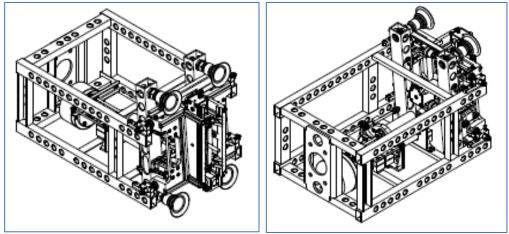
Drawings of the measuring system - replicator for groove's measurement
